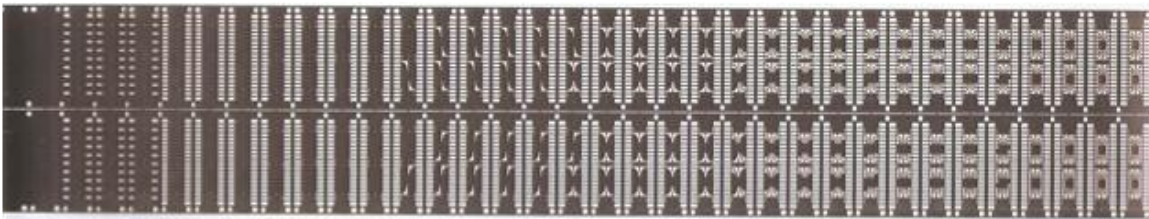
Leadframe showing progressive stamping. The machine would feed the strip from left to right.
